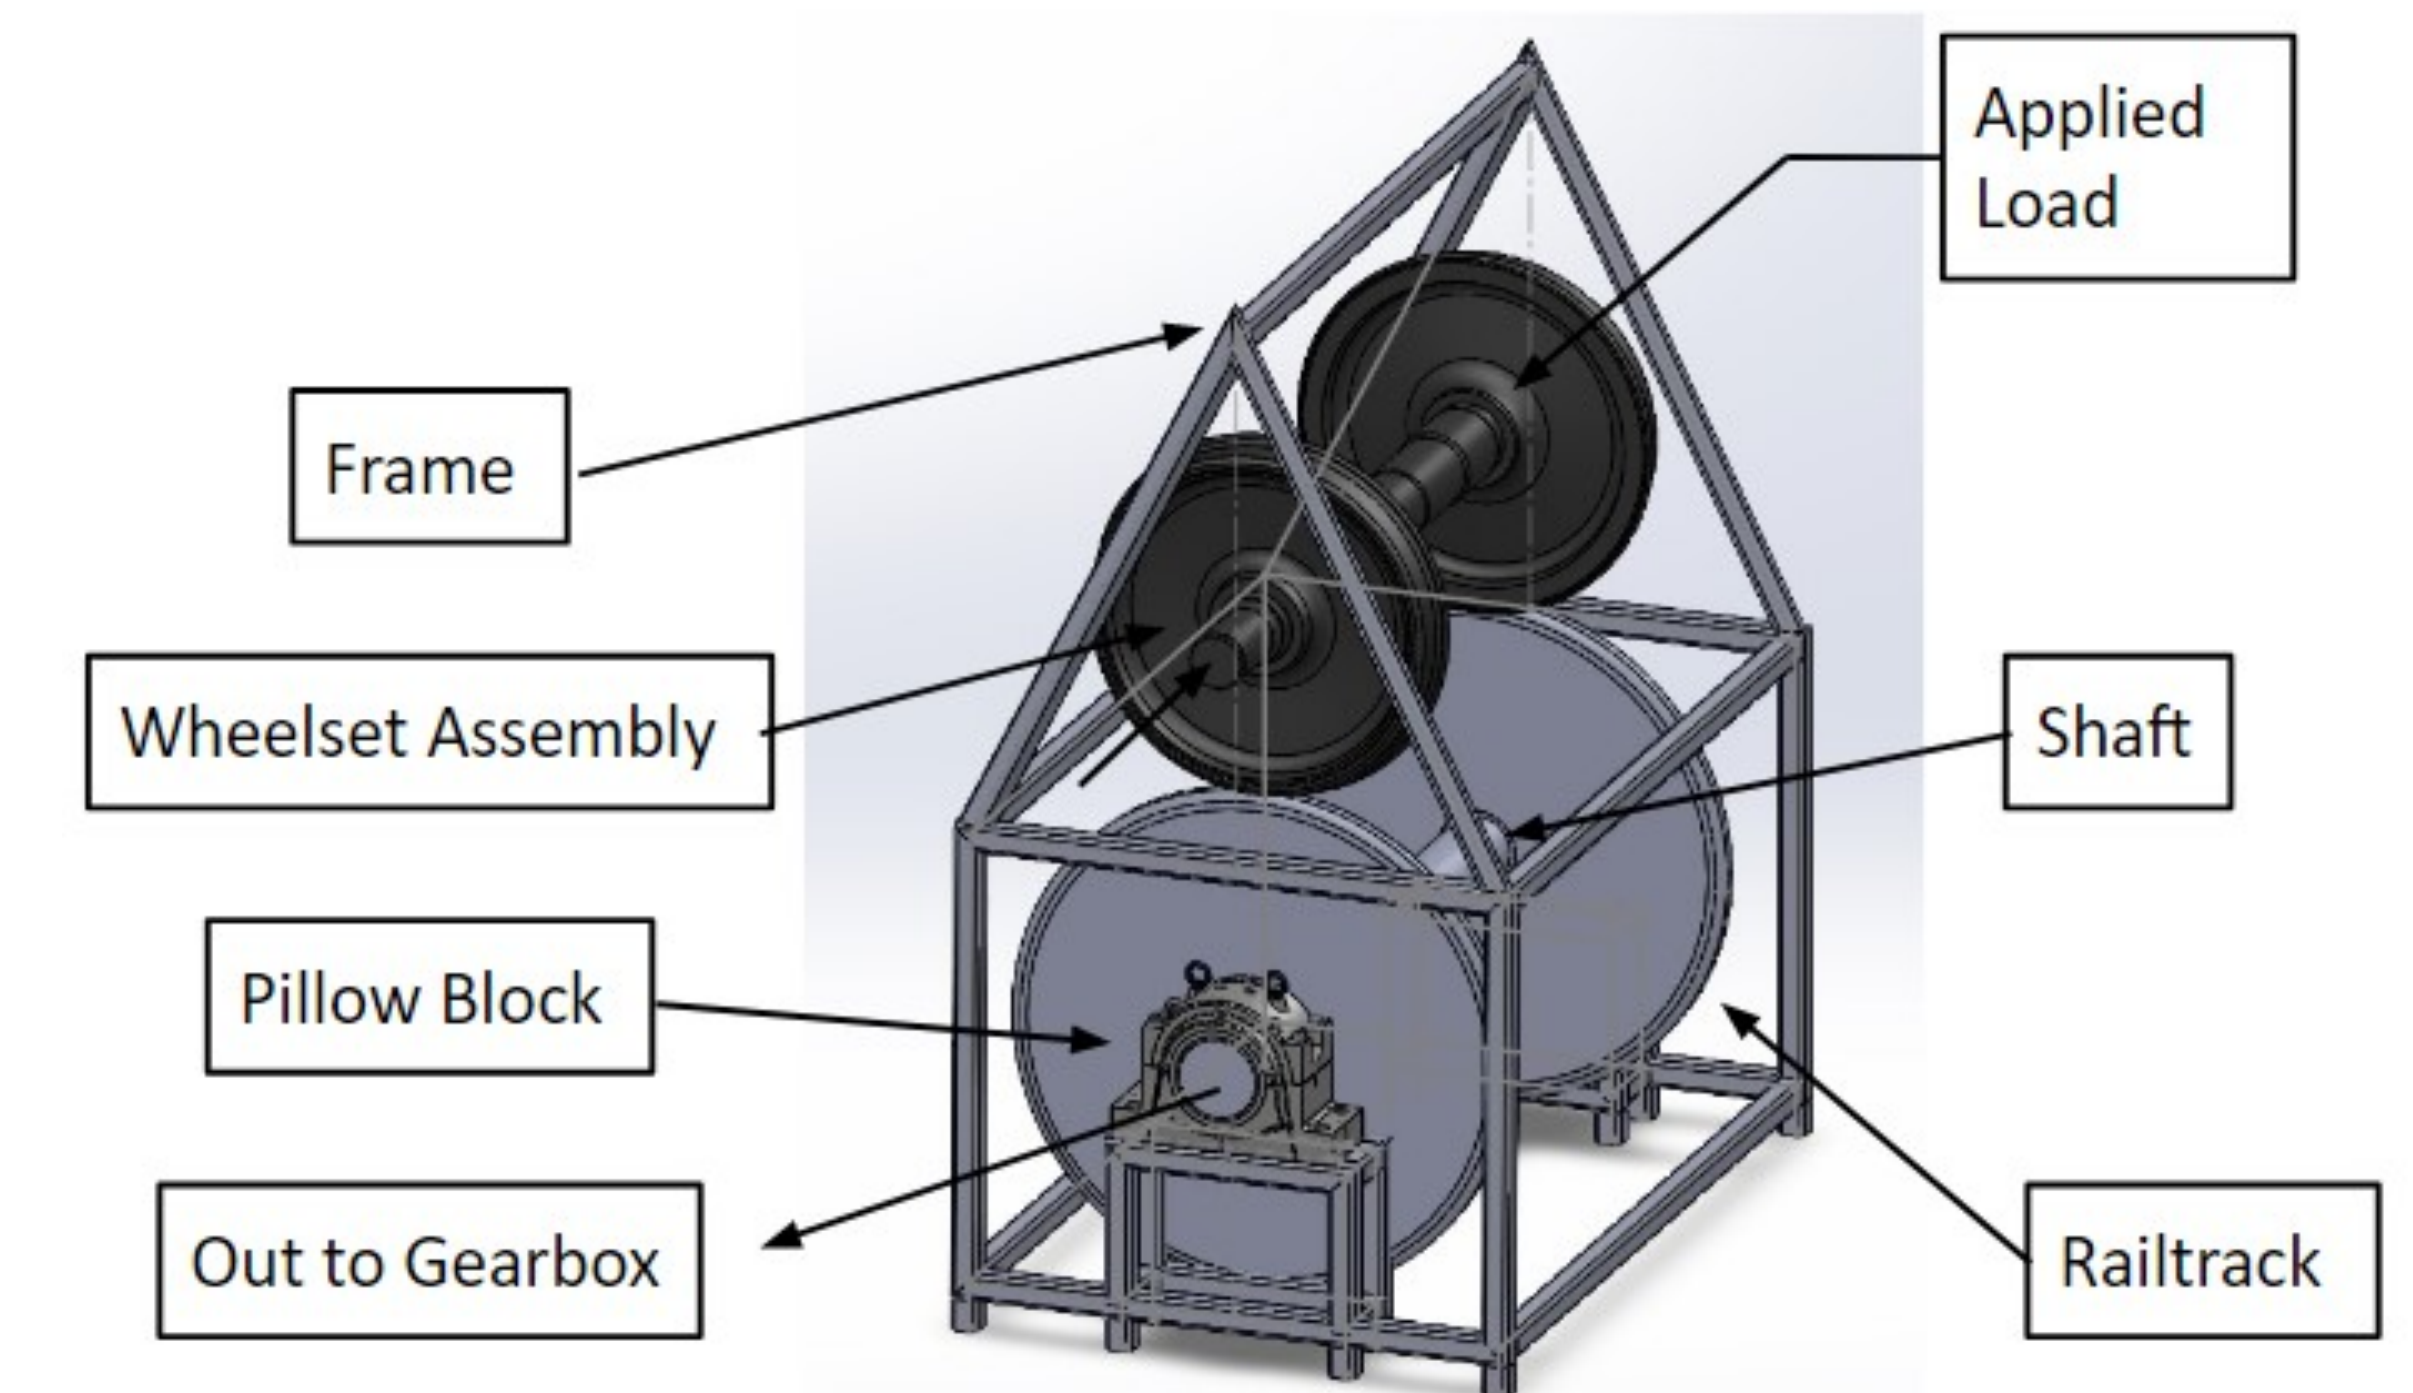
CAD Model of the Driver Axle, Wheelset, and Frame
